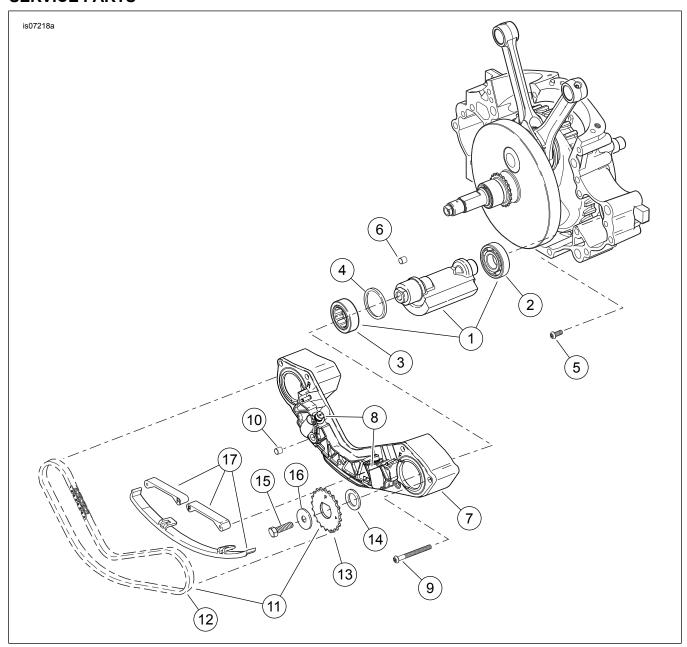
Service Parts: SE120R Screamin' Eagle Pro Crate Engine (Beta) Engine Balancer
